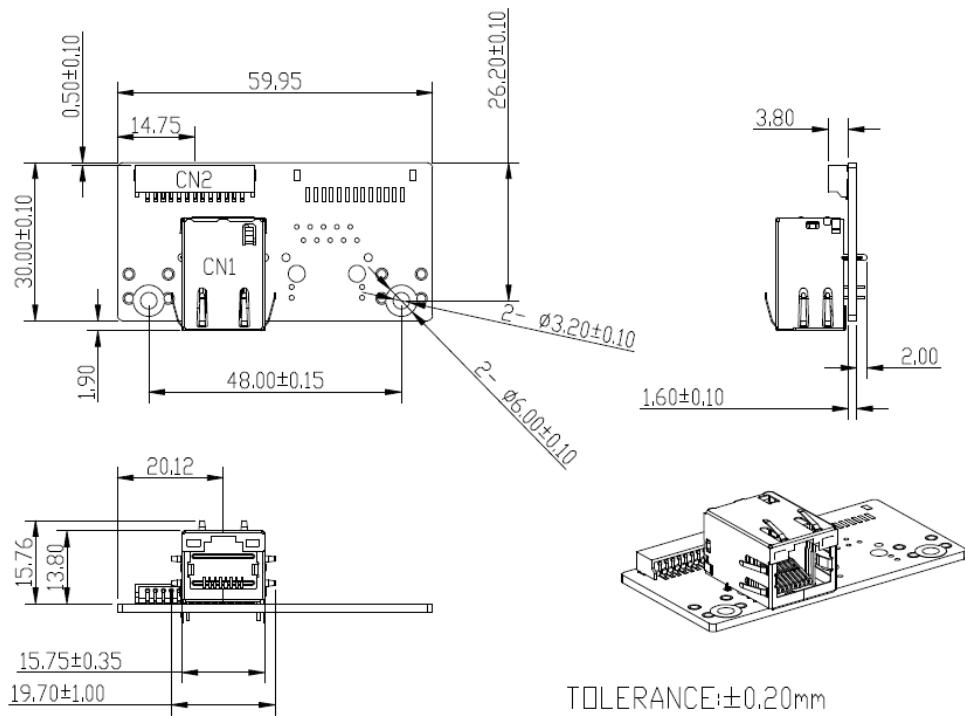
Bracket Daughter Board Drawing (EMPL-G102-C4/W4)
